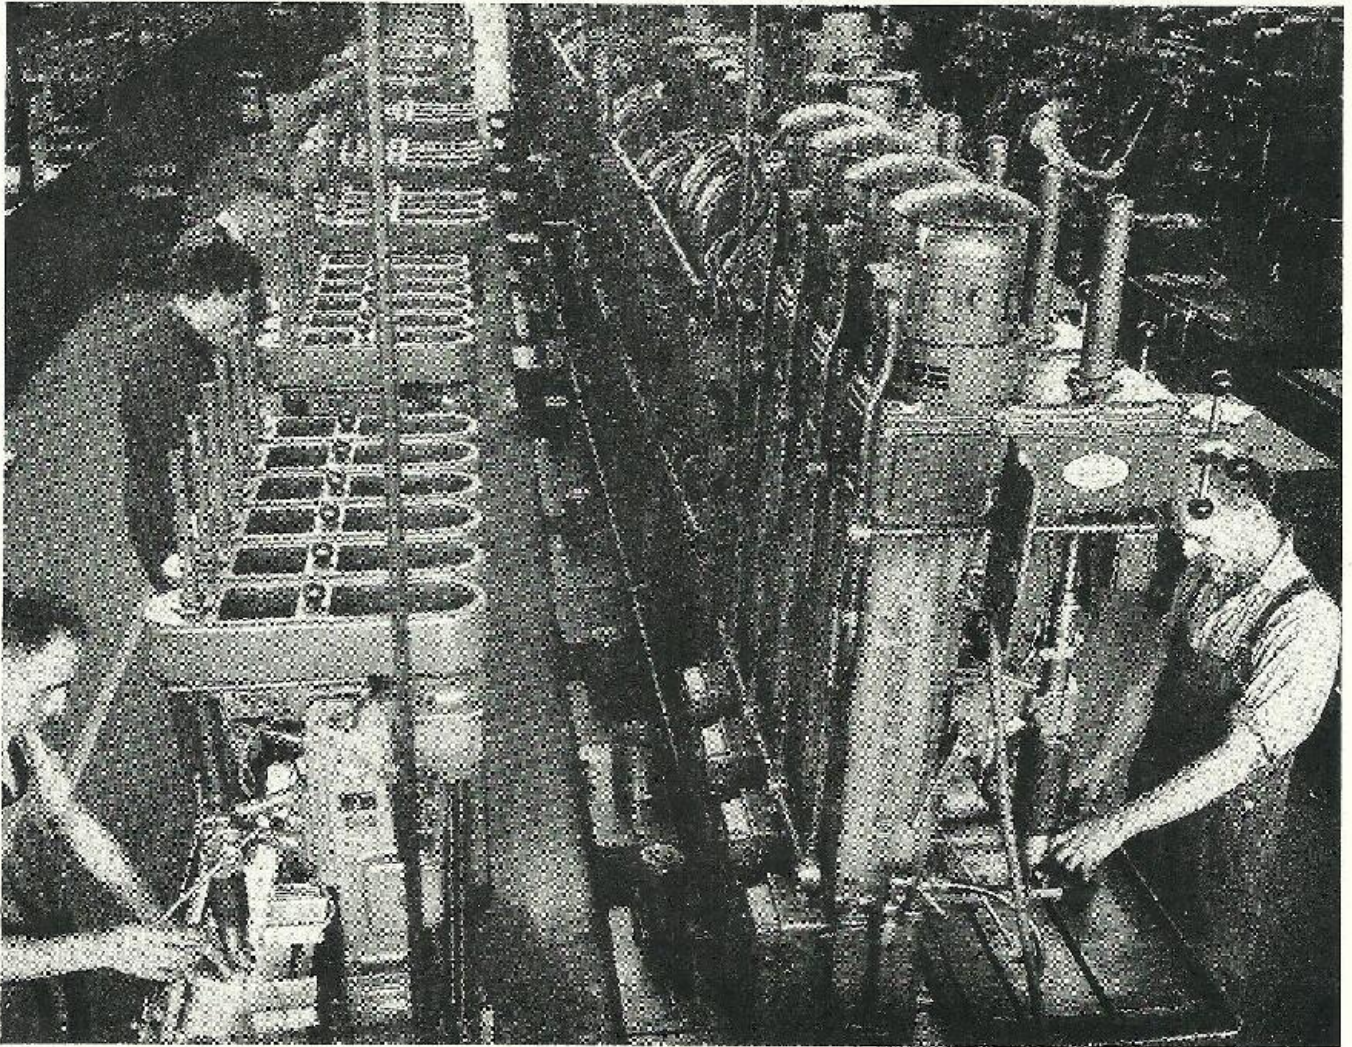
A view showing part of the large drilling section engaged in the manufacture of 'Monotype' parts
